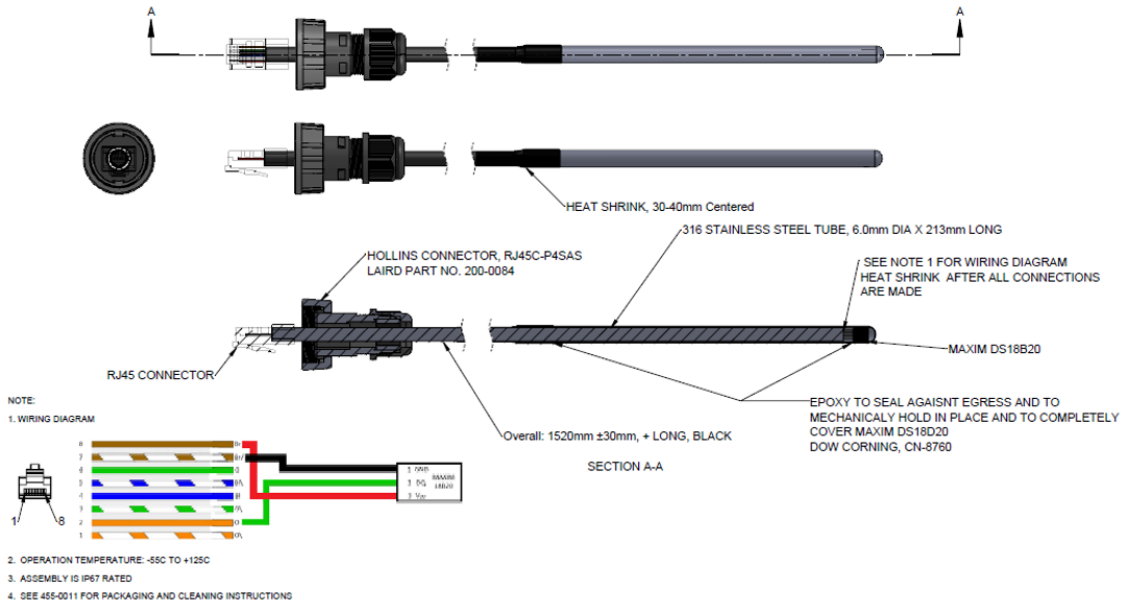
1-Wire Digital Thermometer Probe cable assembly
